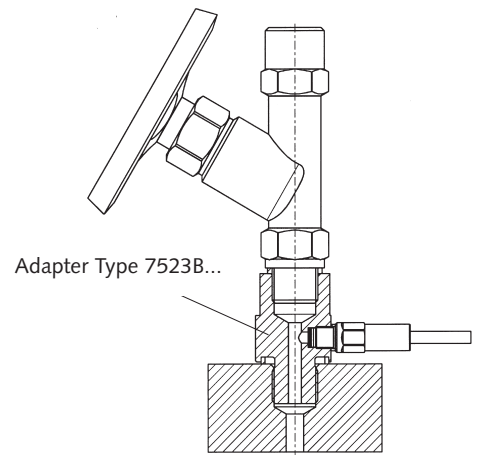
Sensor installed with adapter Type 7523B... underneath the indicator valve
